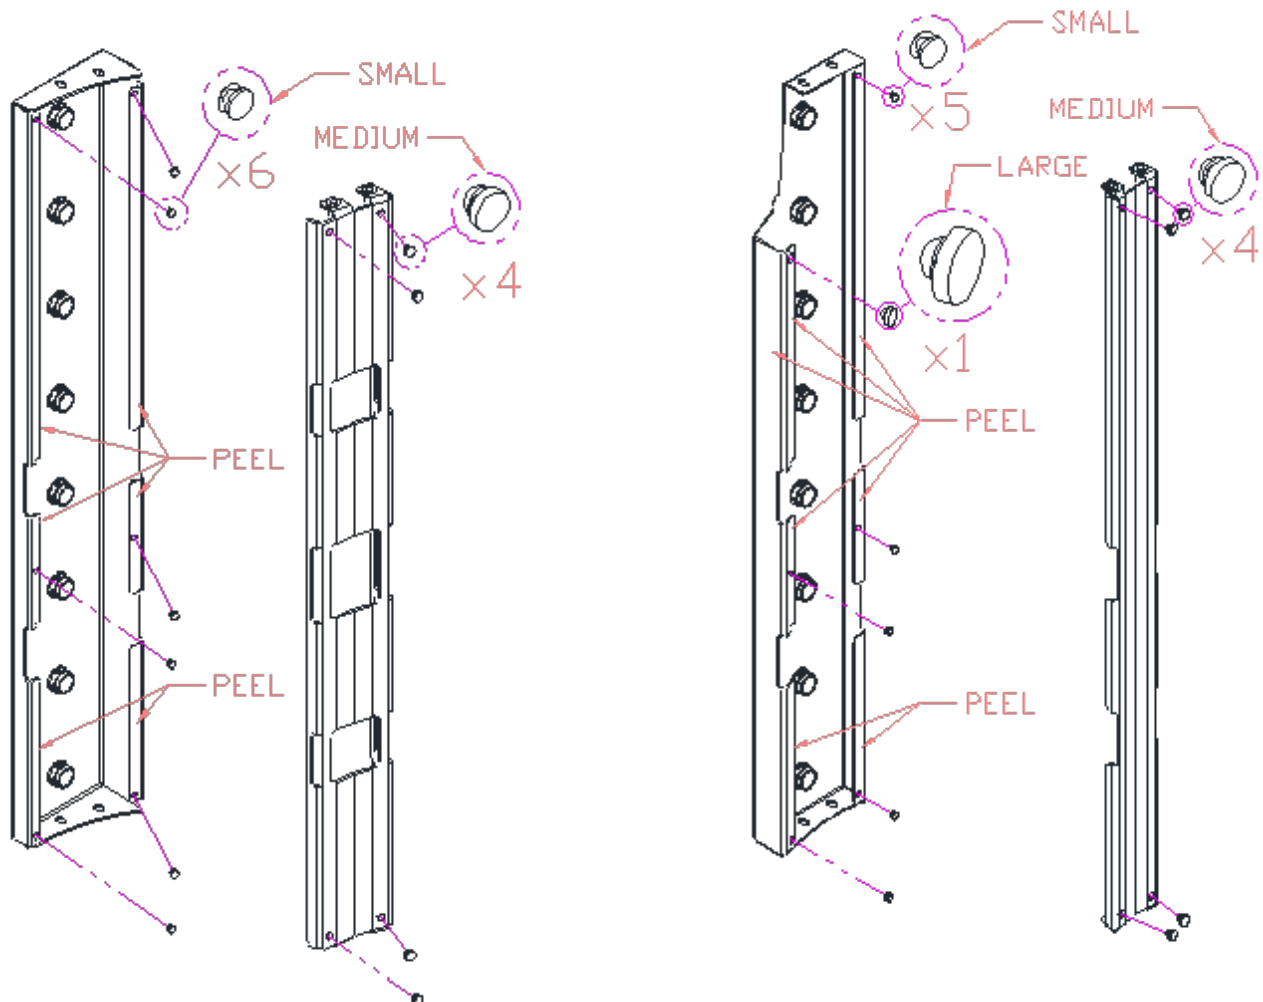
Where to Install Rubber Bumpers & Where to Peel (Driver Front [Left] & Rear [Right] Shown)
